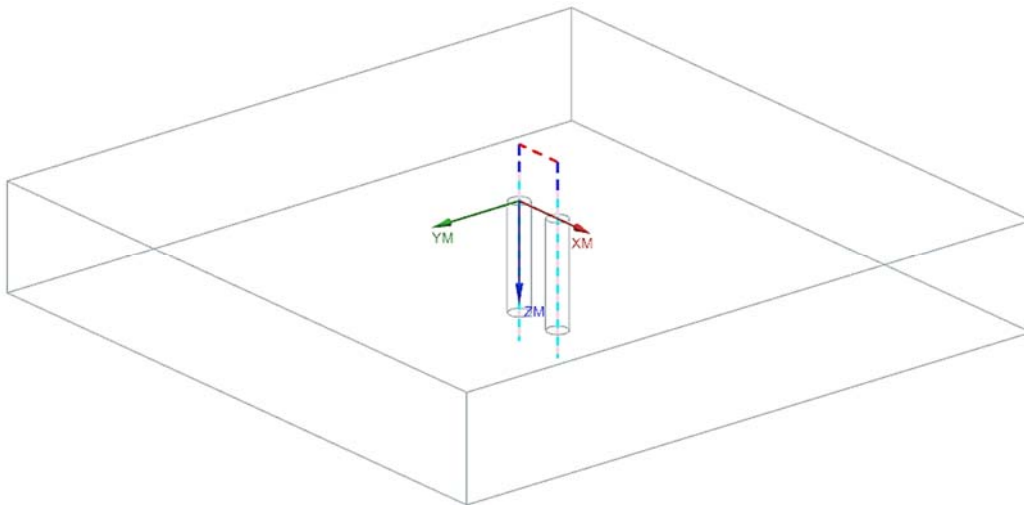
Tool path for drilling two holes relative to work piece frame.
